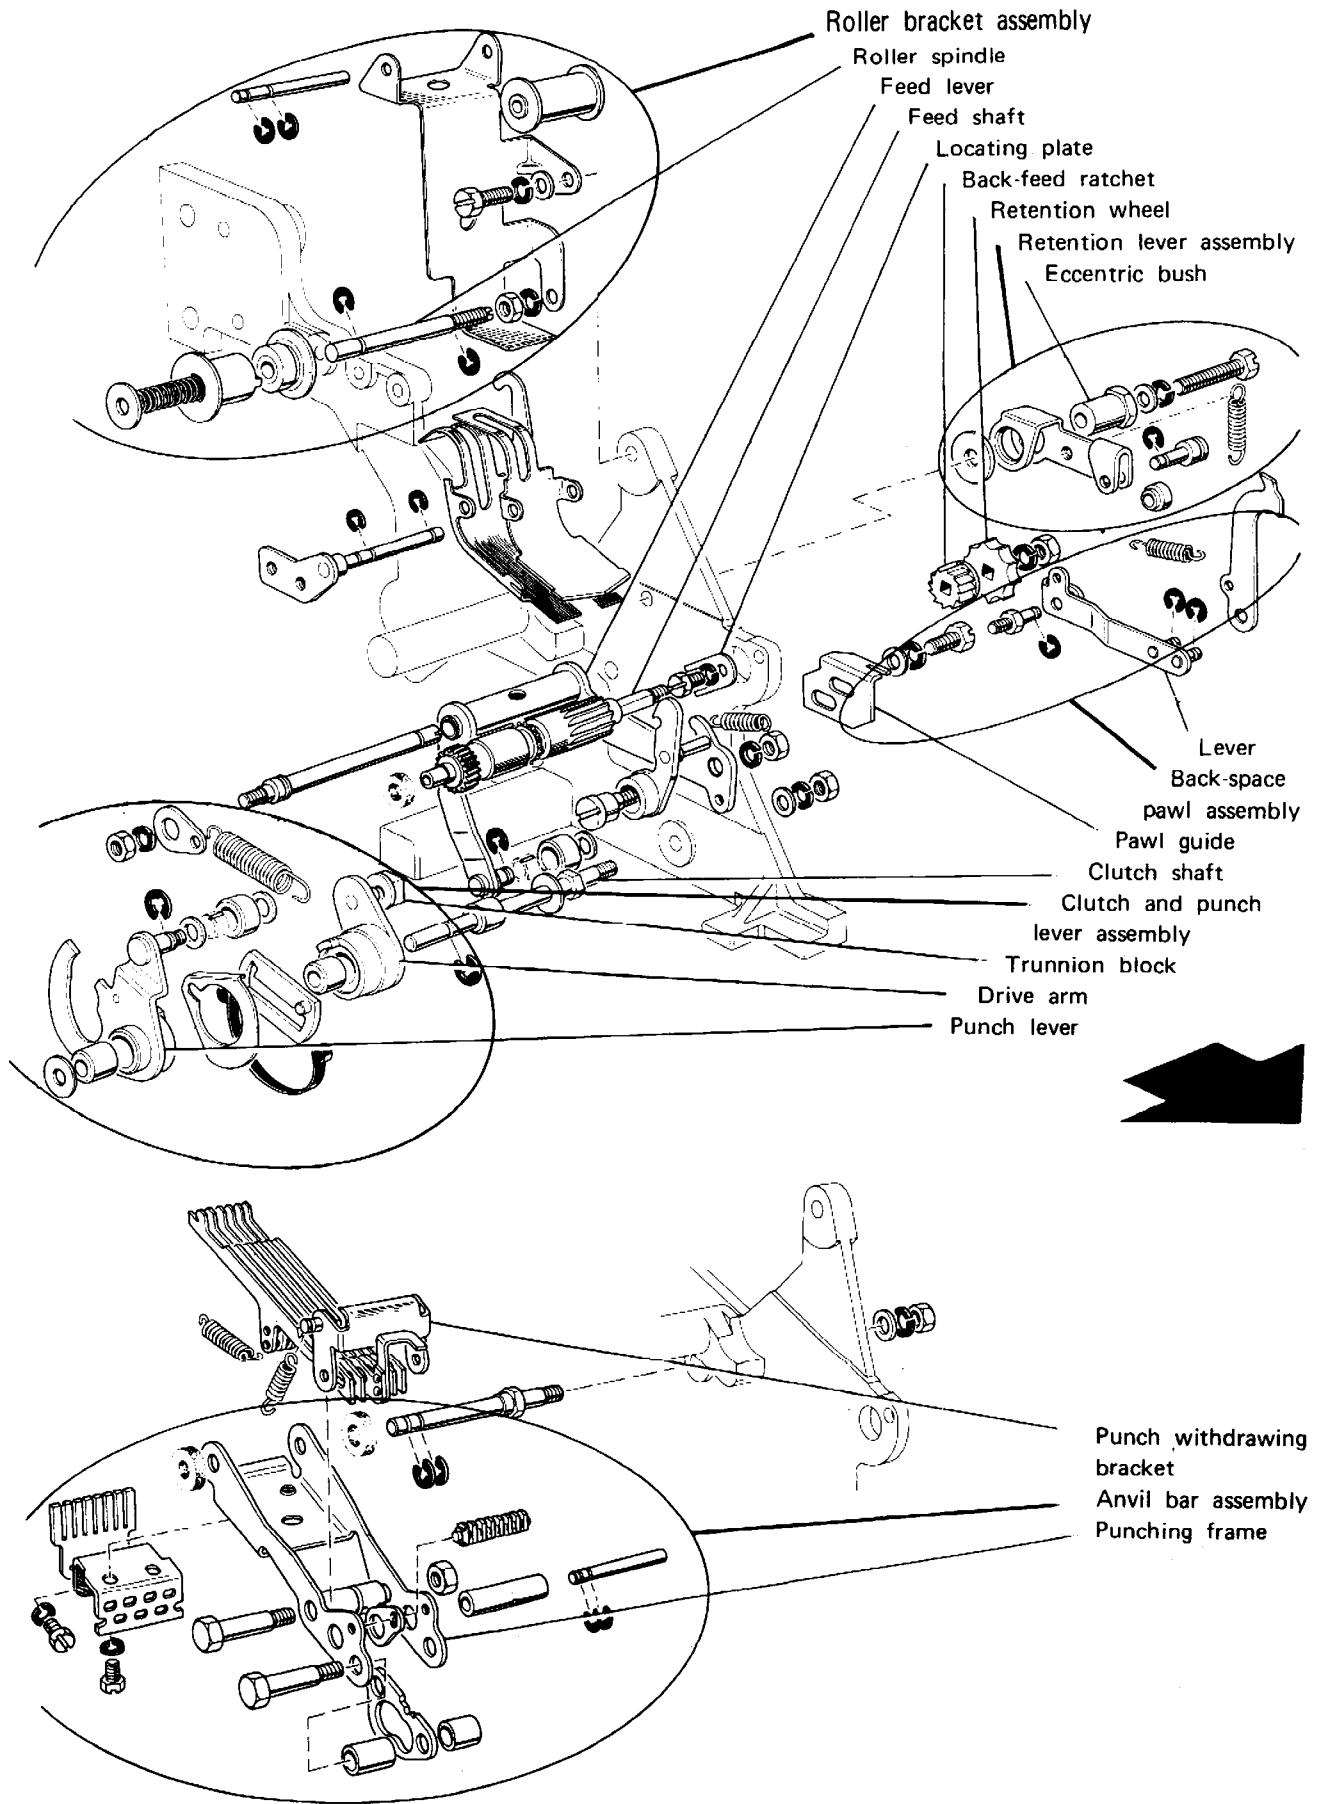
TAPE PUNCH UNIT FEED AND PUNCH MECHANISMS
